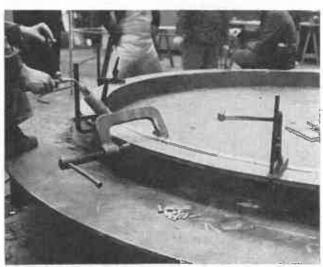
Pre-heat is being applied before weiding flange to cap during fabrication of radial stiffener rings.
